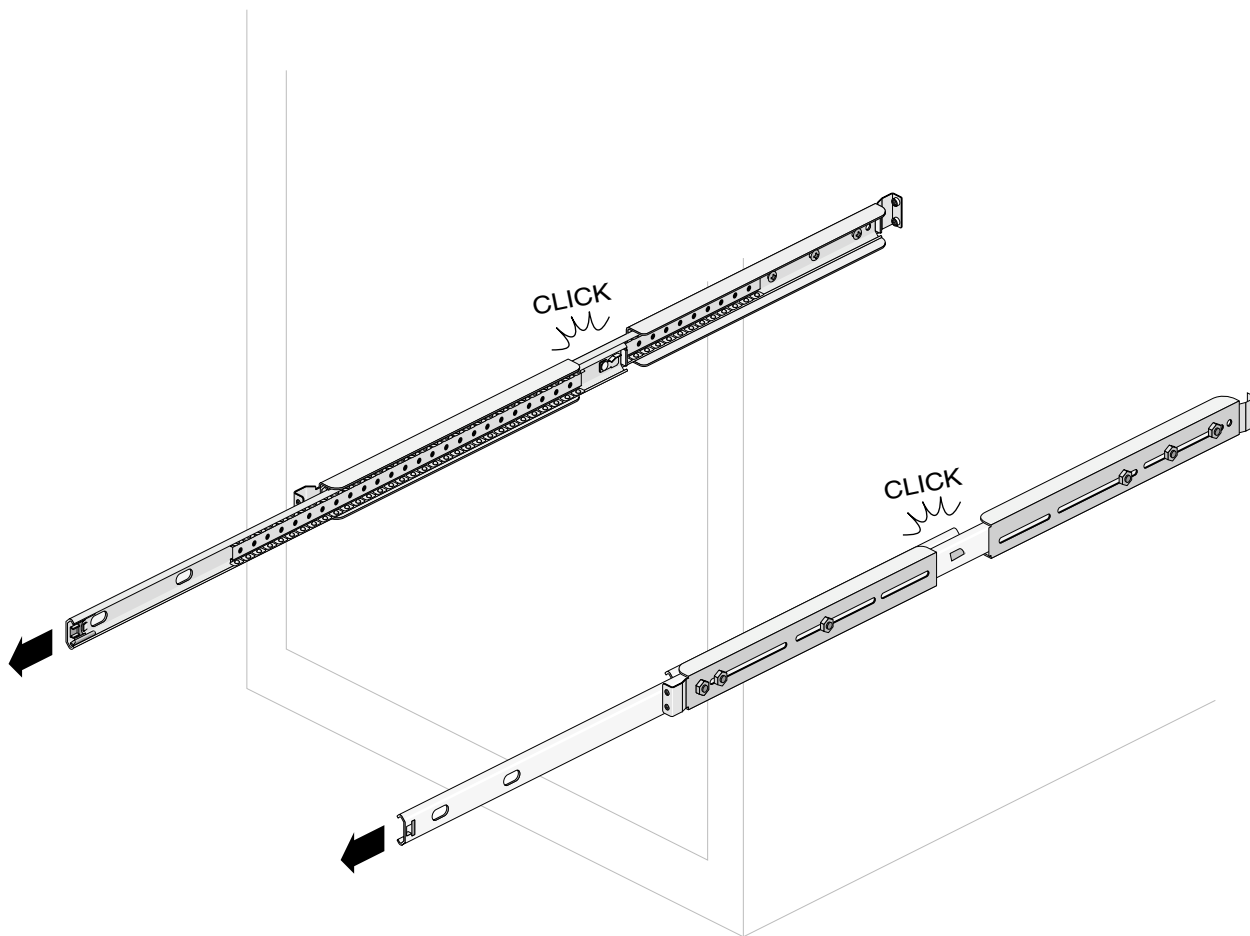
Attaching Rails to SGI 1100 Server Chassis
